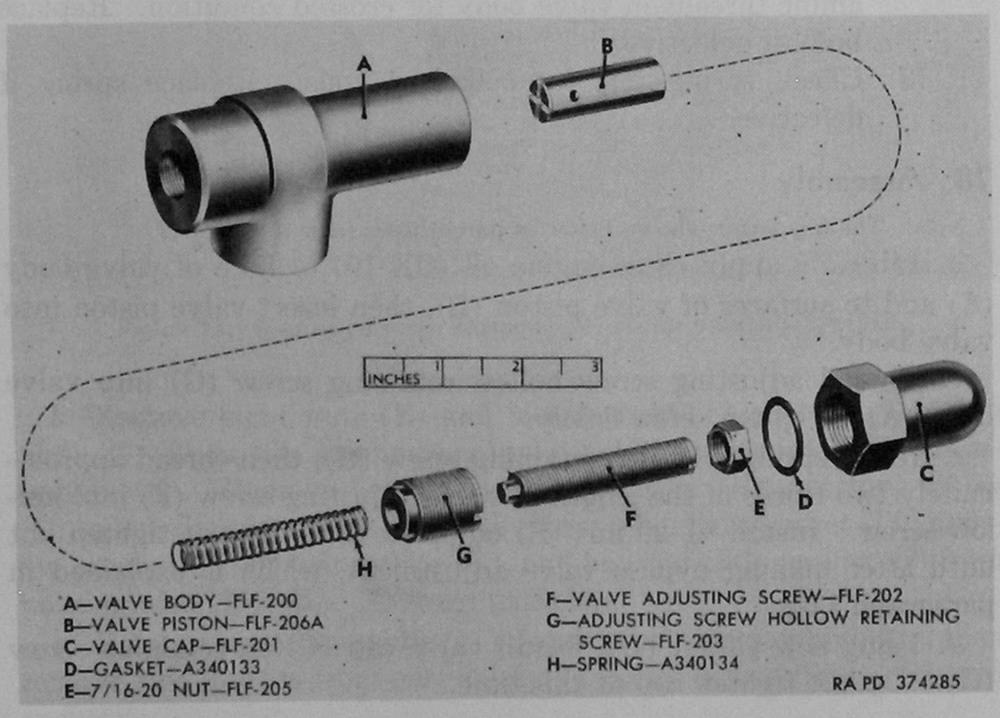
Engine oil bypass valve components—engine assembly 8726920.
